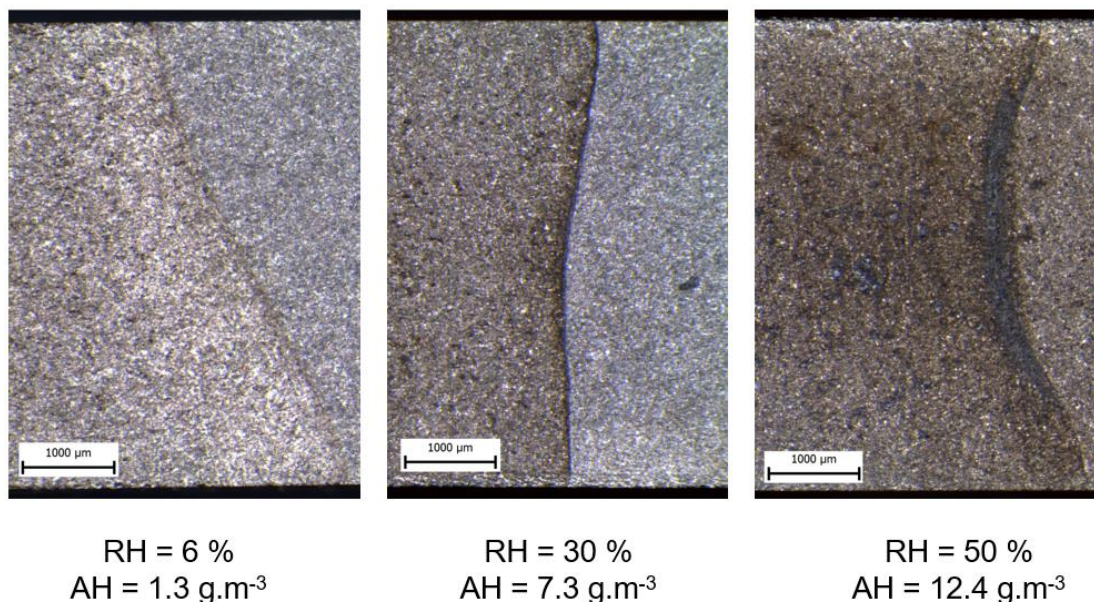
Fracture surfaces of specimens tested under different humidity conditions (abbreviations RH = relative humidity, AH = absolute humidity)
